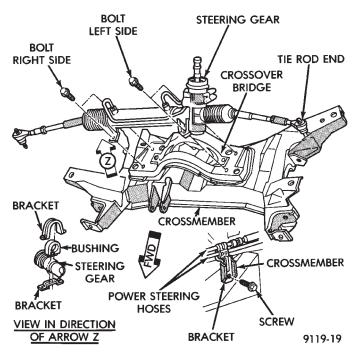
Steering Gear Remove/Replace gear shaft. THIS IS REQUIRED TO HAVE ADE-QUATE CLEARANCE BEFORE TRYING TO REMOVE THE STEERING GEAR FROM THE VEHICLE.
